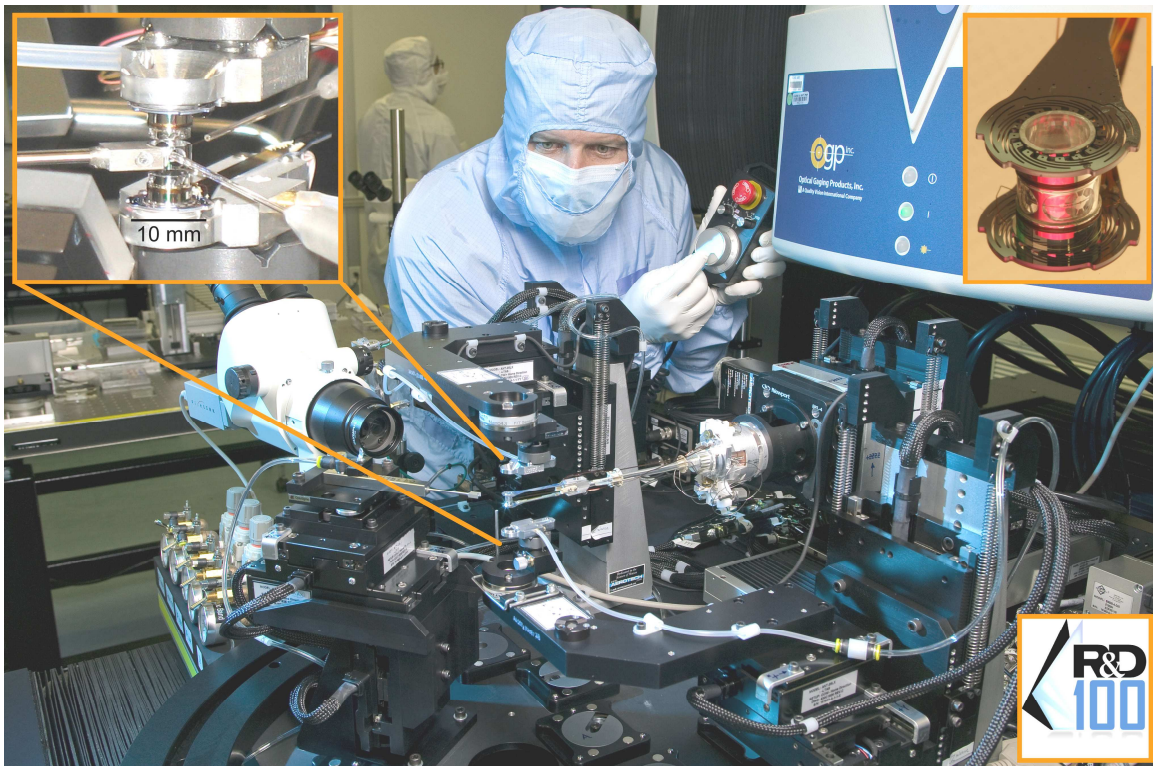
The Precision Robotic Assembly Machine releasing a laser fusion target that was just assembled.
